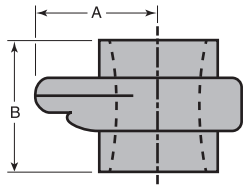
Butt Weld Schedule 160 and XXH
